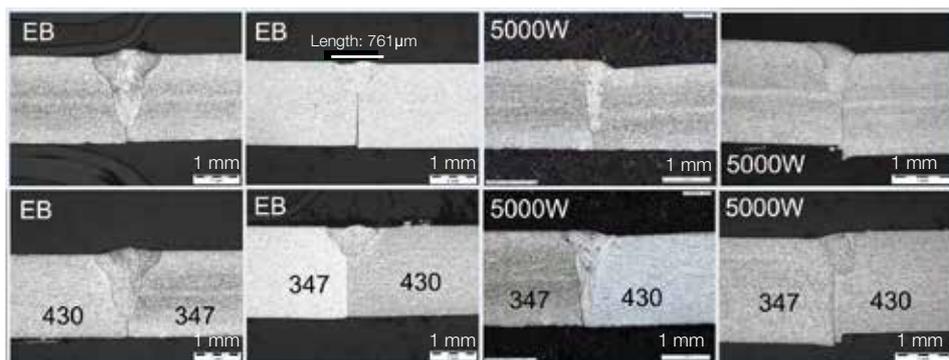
Example power beam butt welds in (top) 347-347 joints and (bottom) 430-347 joints, made using EB (left) or laser (right) systems, to penetration depths of either 0.7mm (EB or pulsed laser welding (QCW-p)) or 1.5mm (EB or multi-kilowatt cw laser welding).
